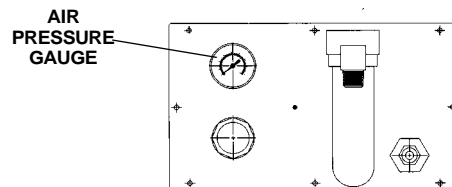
DRIVE UNIT – REAR PANEL
